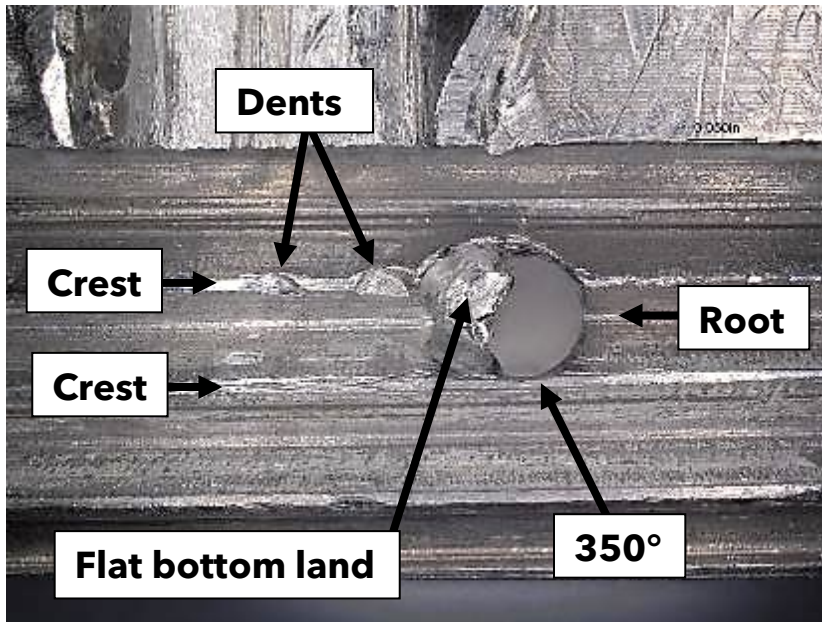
Outer threads of the clamp nut showing a partially obstructed through-hole at approximately the 350 degrees position; after ultrasonically cleaning the clamp nut with acetone. The clamp nut is in the full disassembled condition.
